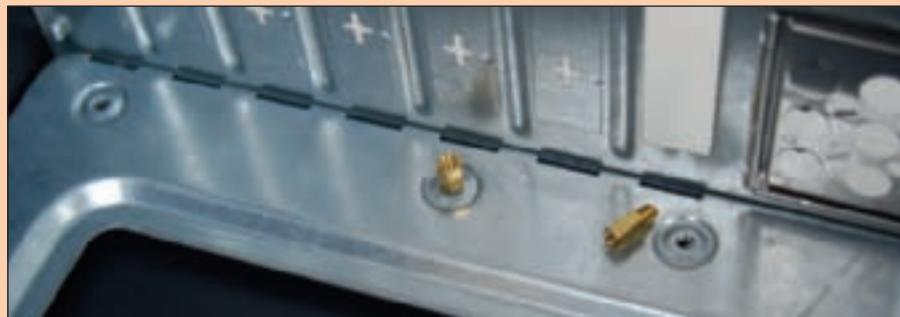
Spacers installed in case holes keep the motherboard from causing a short
